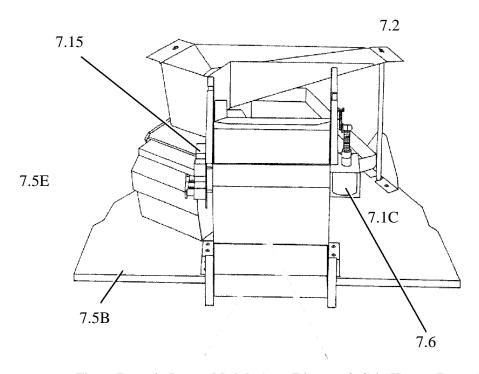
Payout Module Assy (Diverter & Coin Hopper Payout)
